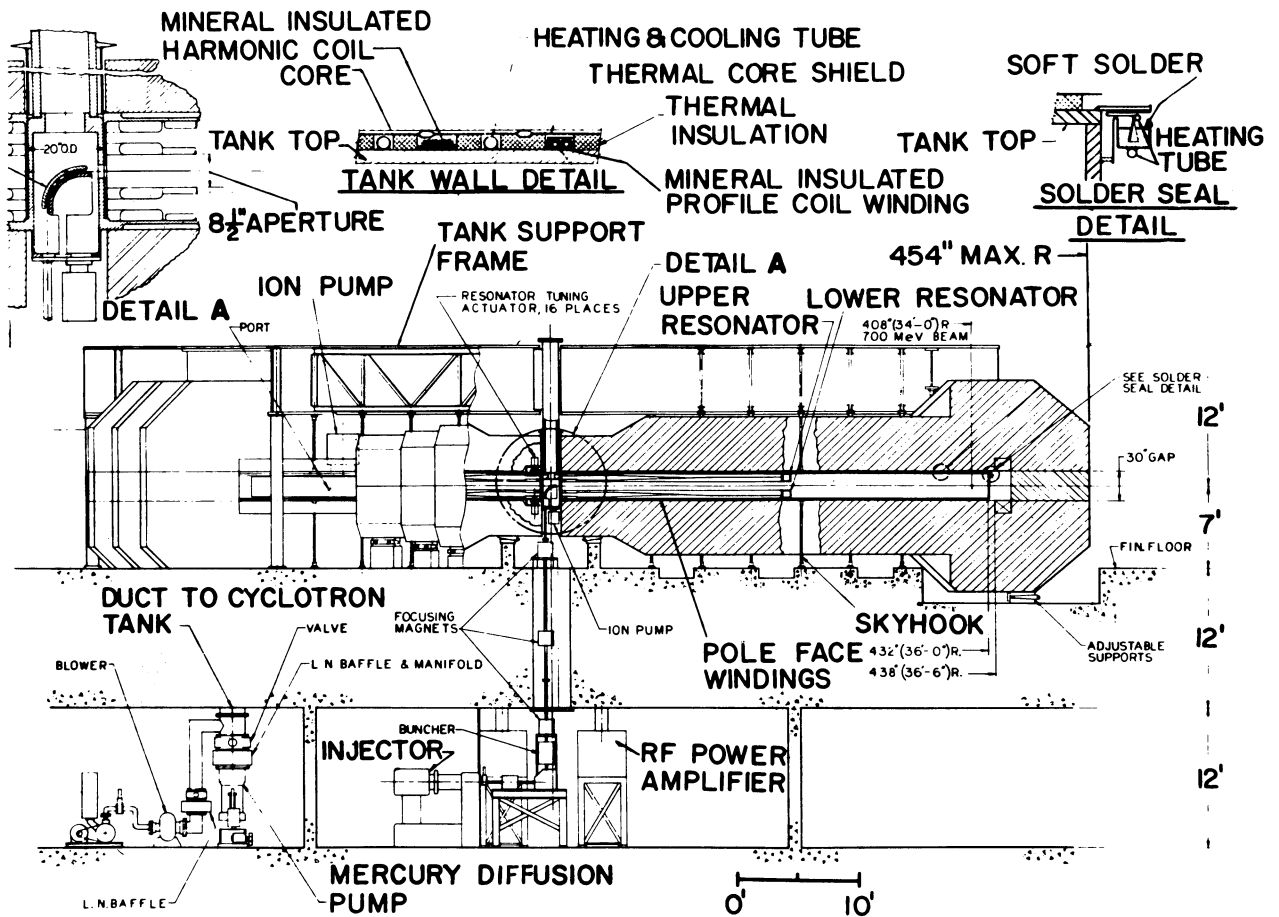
Elevation and section, with detailed sections of the central region, tank wall, and vacuum-tank solder seal.
